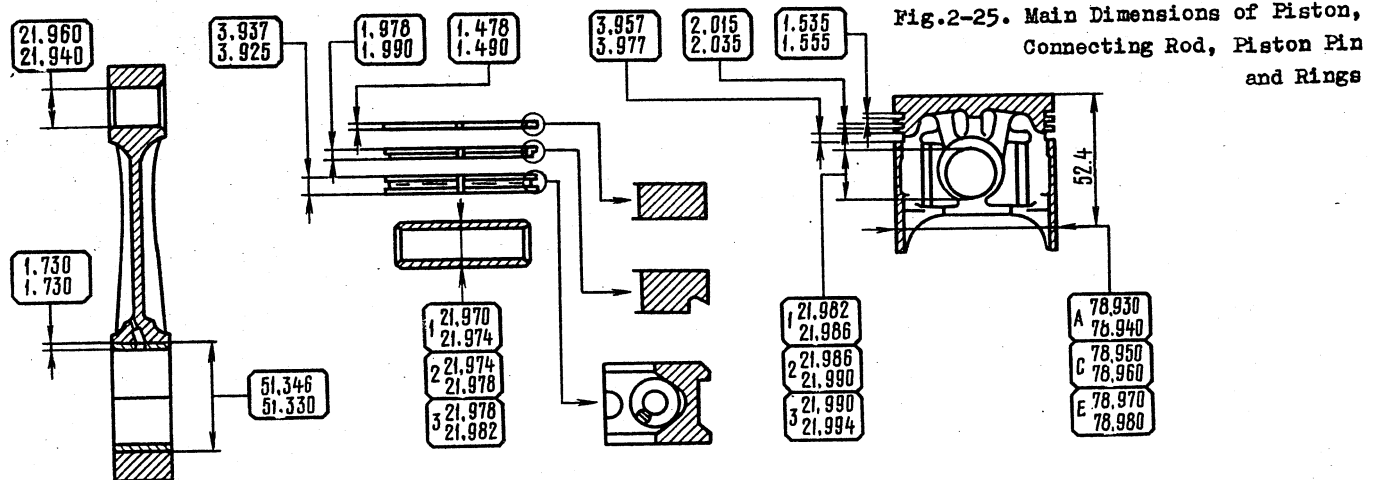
Main Dimensions of Piston, Connecting Rod, Piston Pin and Rings
